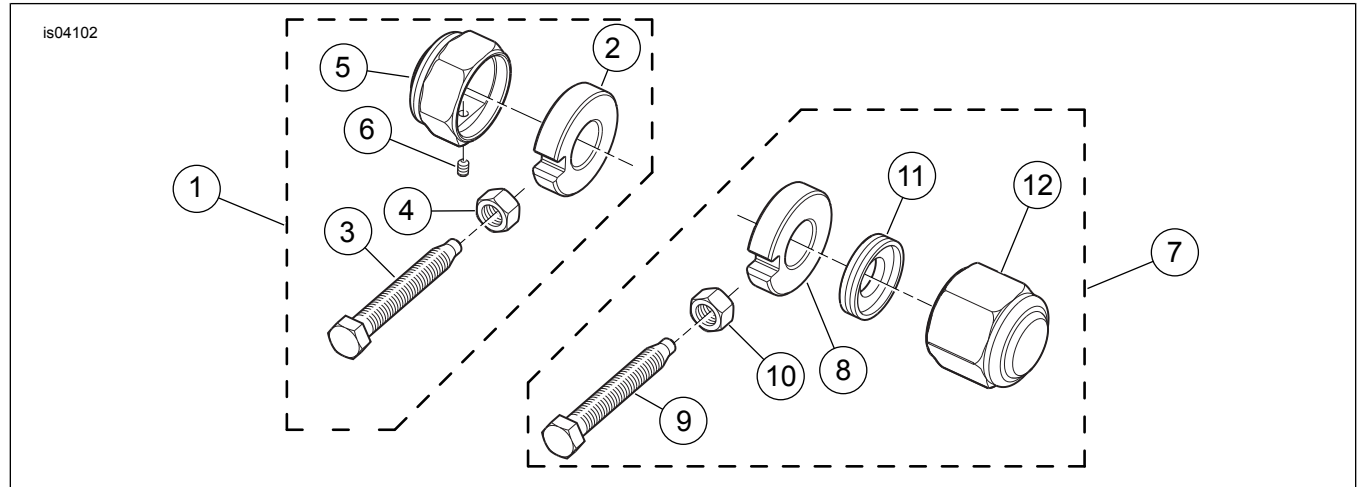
Service Parts: Chrome Rear Axle Adjuster and Cover
